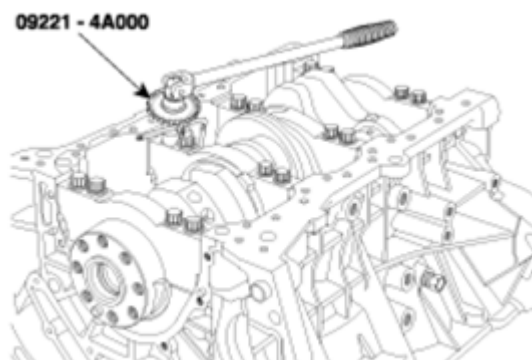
Installing Main Bearing Cap Bolts Using SST (09221-4A000)
